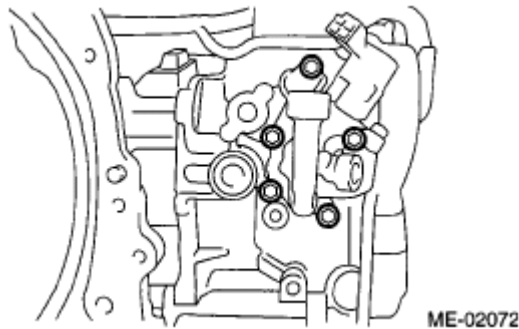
Identifying Oil Switching Solenoid Valve Holder
